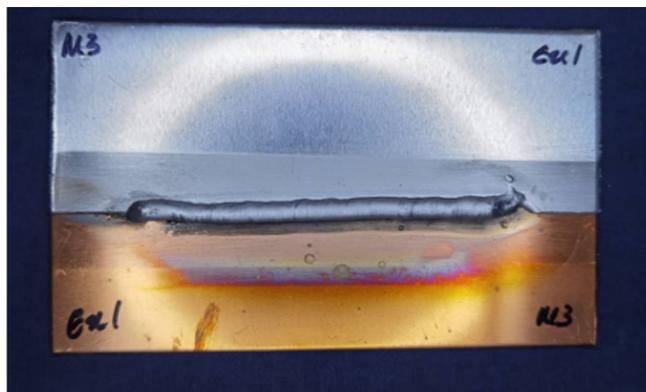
Peeled-off after welding process (MIG conventional).
